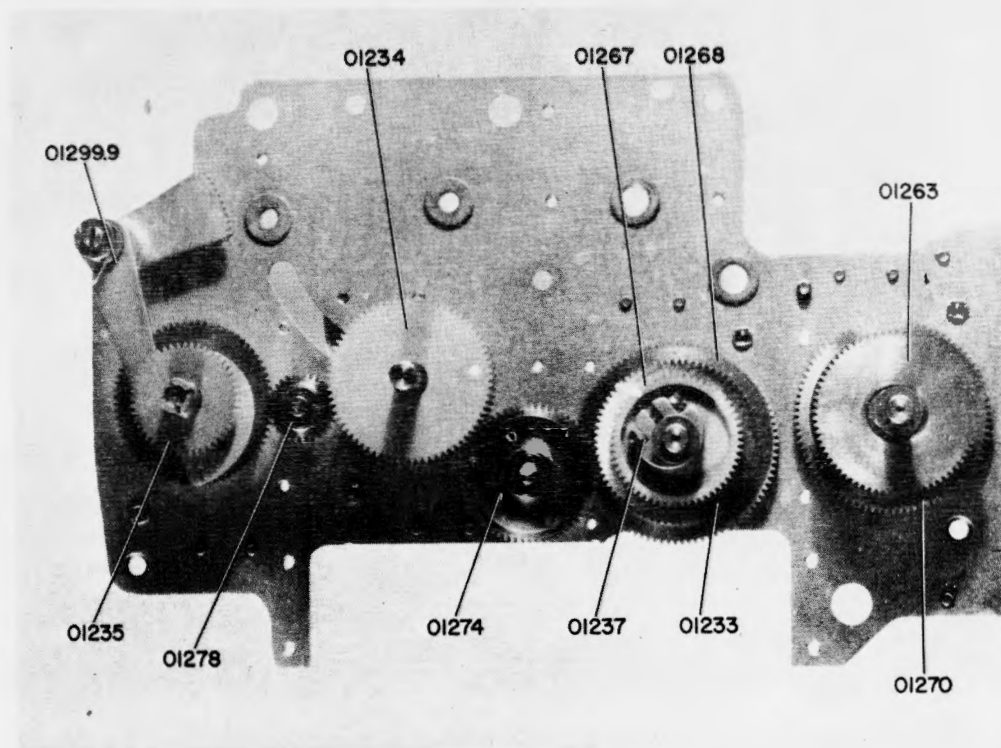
RT-581( )/URC-9, Frequency Selector, Rear View of Front Plate
